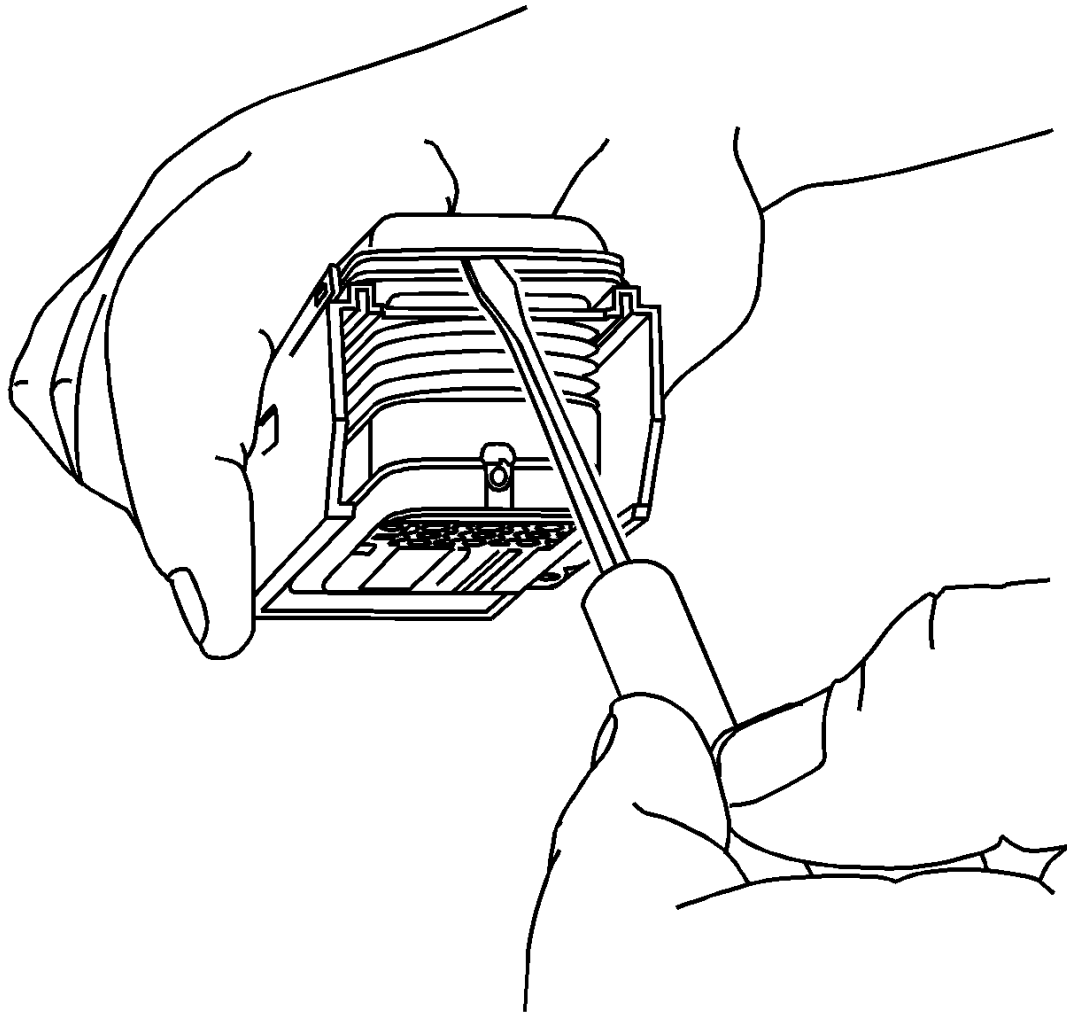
Using Small Flat-Blade Tool To Remove Dress Cover
